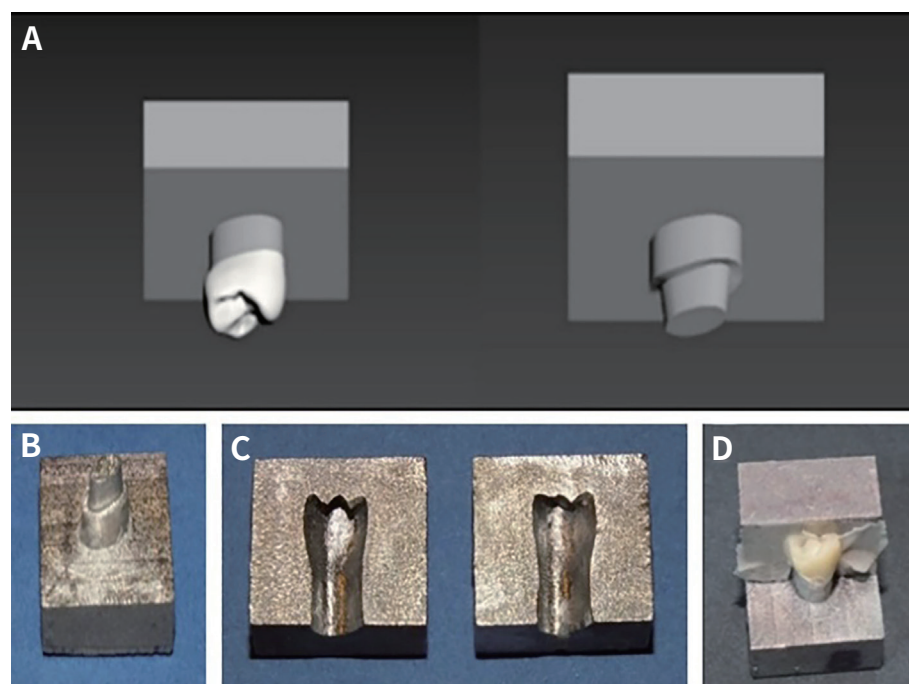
Removal of crown specimens made of autopolymerized acrylic temporary restoration material from molds and correction of overhanging material. (A) CAD design of the Cr-Co mold, (B) Base part of the mold, (C) Removable part of the mold, (D) Polymerized crown before correction.
